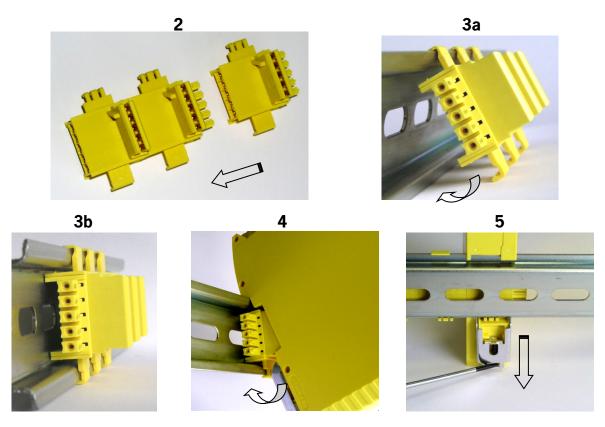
Fastening modules of the MSC system to a 35-mm DIN rail
